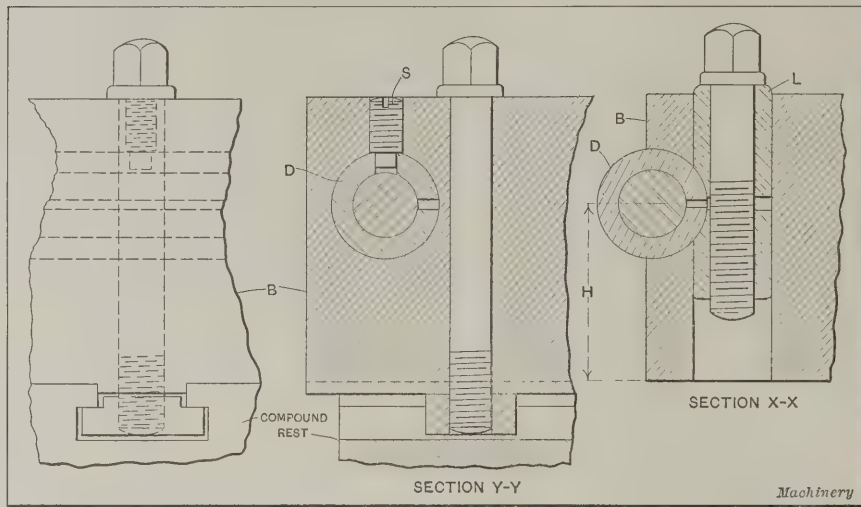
Partial Side View and Sectional Views of Ellipse Turning Fixture
